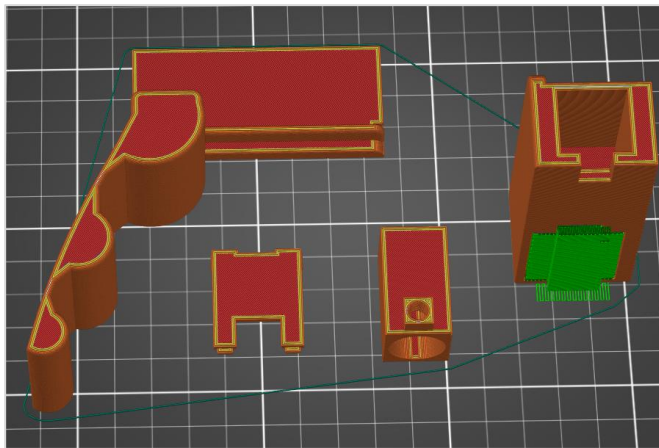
Shoulder Support Parts' Positioning on the Printer Bed
